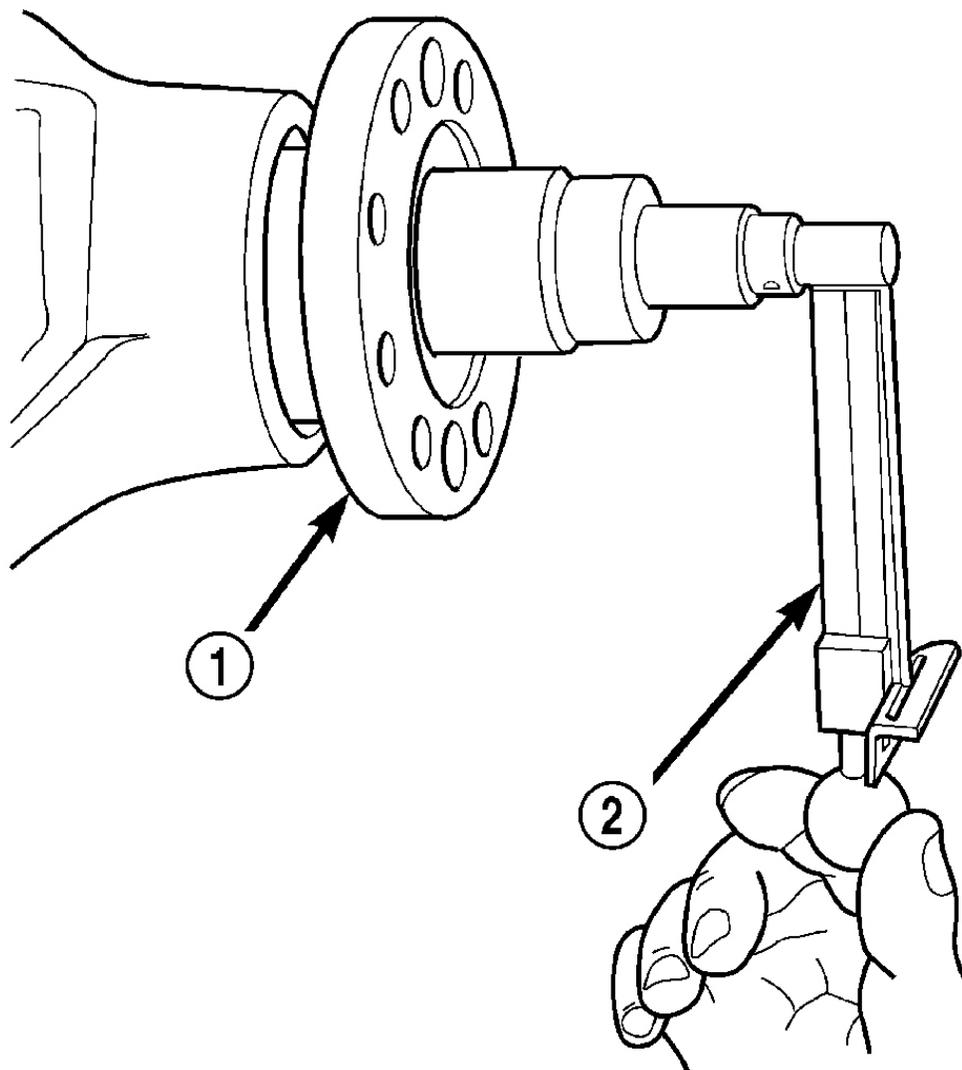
Installing Shaft Seal With Installer 8806 And Handle C-4171
